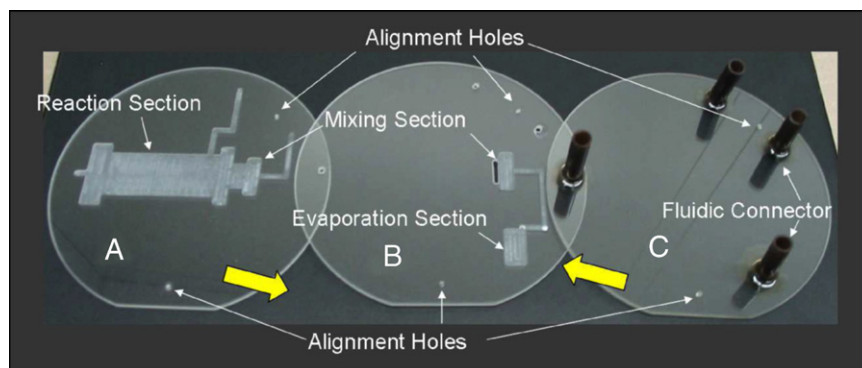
Machined glass wafers used in microreactor assembly. Glass Wafers A–C are aligned using alignment holes and bonded using epoxy. In Wafer C, PTFE tubes for fluidic connector have been bonded.
